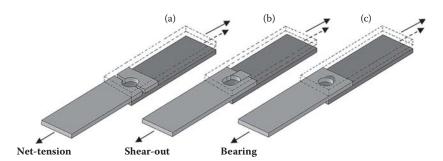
Failure modes of fastener joints in composite plates: (a) net tension; (b) shear-out; (c) bearing failure [11,41,47]
